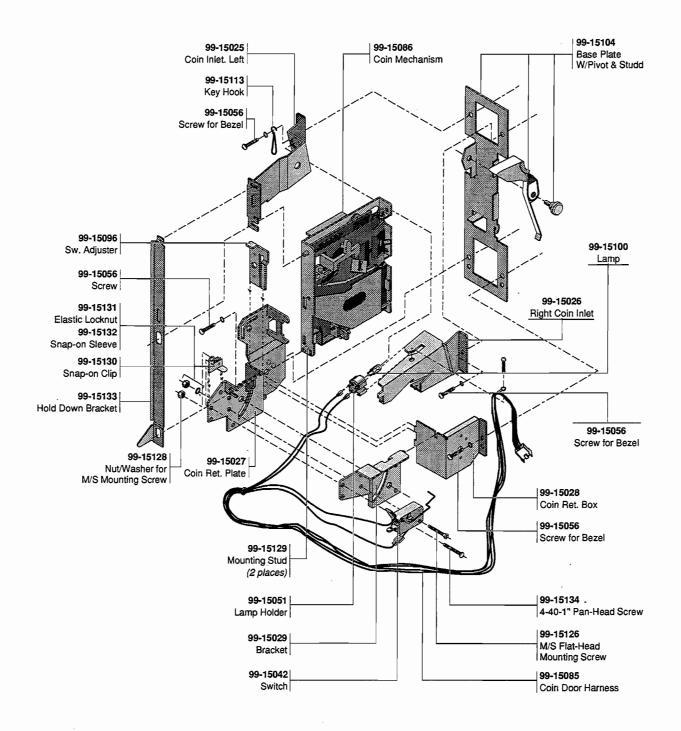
Coin Controls, Inc. Coin Door Assembly
